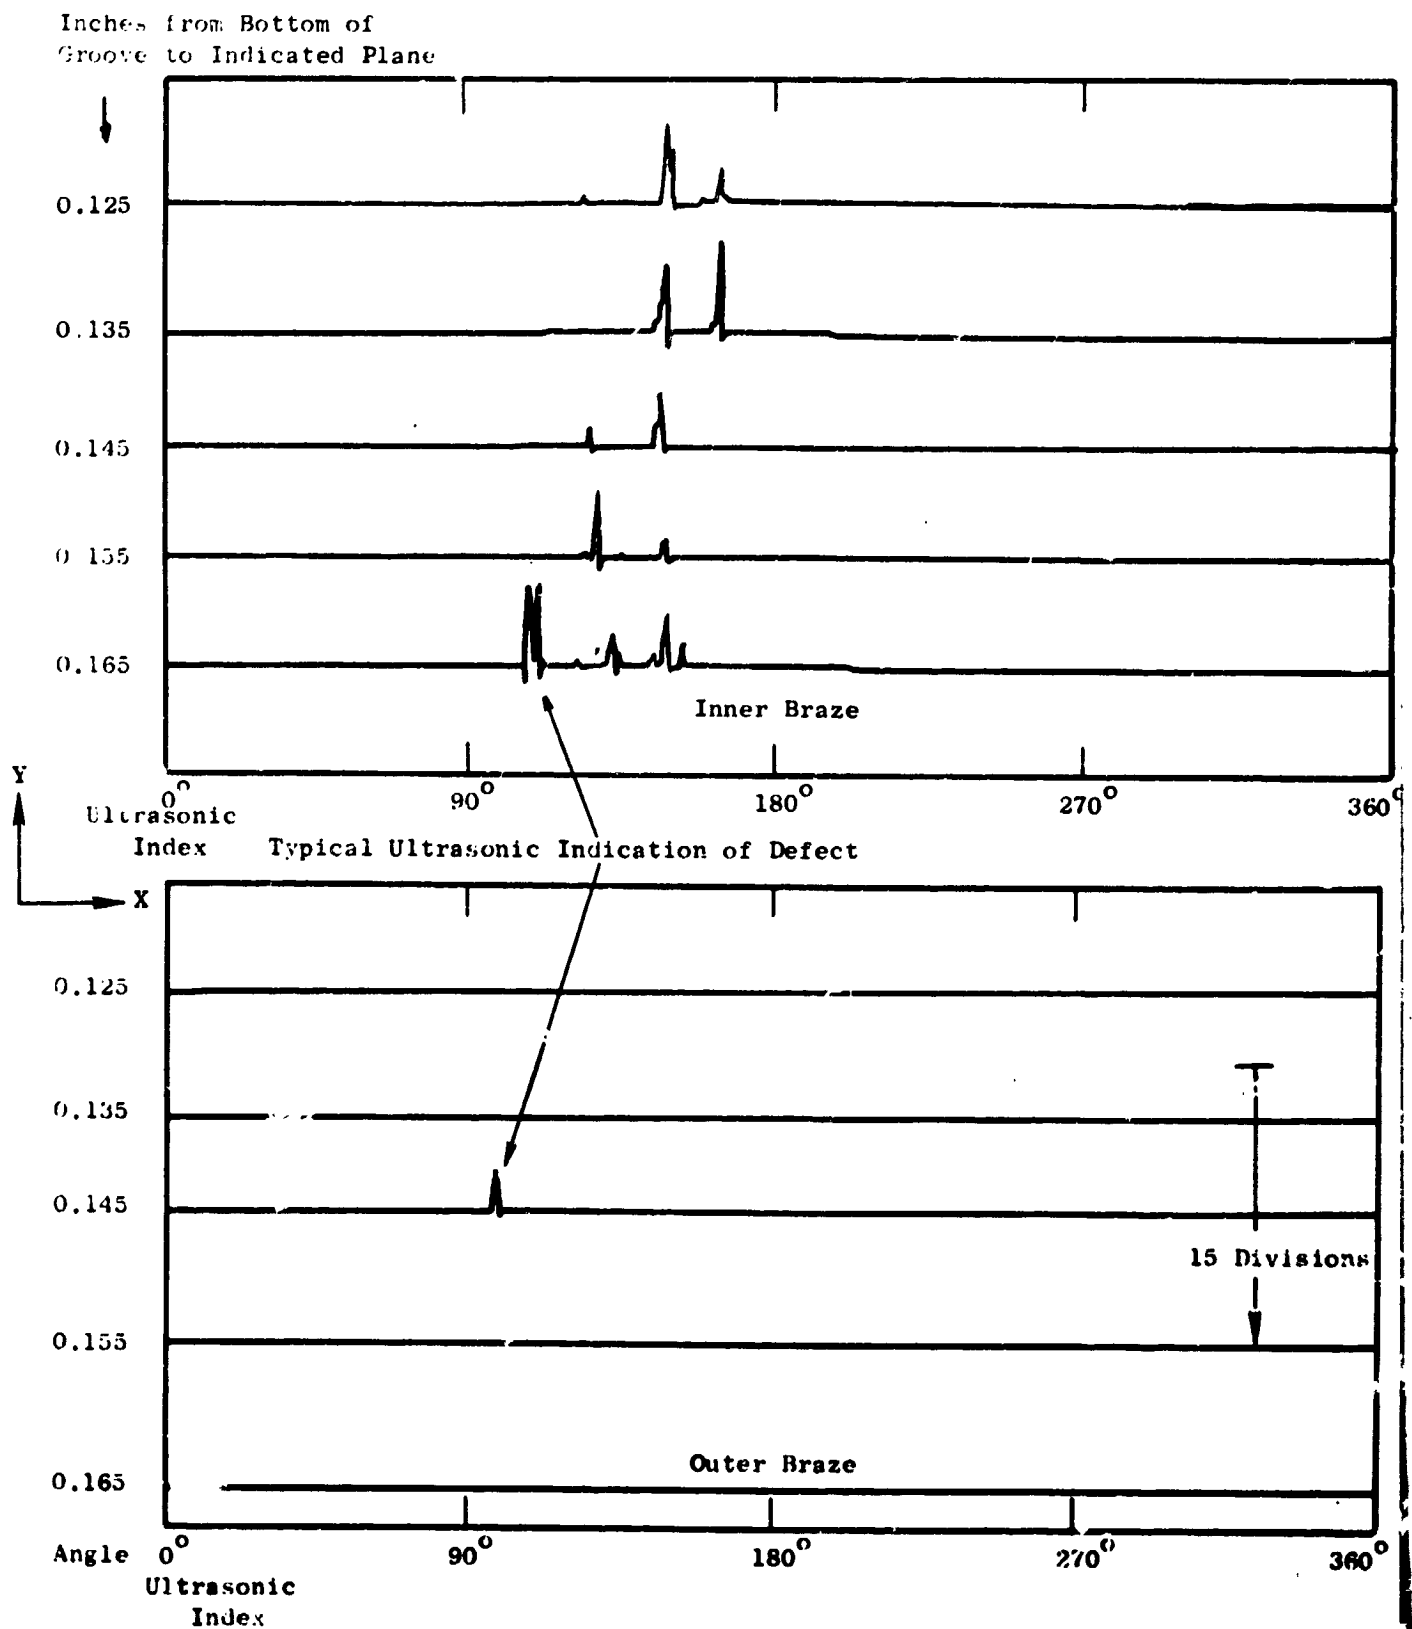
Ultrasonic "Modified A Scan" Presentations Obtained from Inspection of Tubular Ta/Type 316SS Production Brazed Joint S/N 22.
